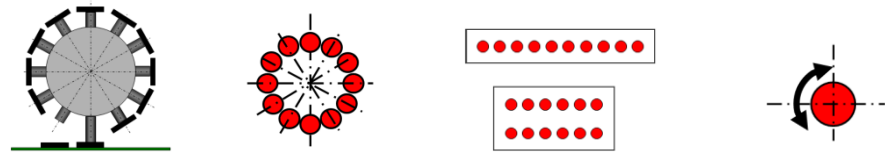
Head types: Revolver head Turret (Multi) pipette beam Single pick head
